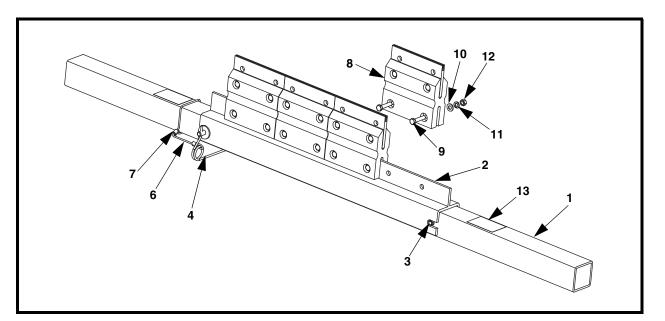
Martin[®] SQC2STM Cleaner Assembly, P/N SQC2S-XXXXXXXXXXX
